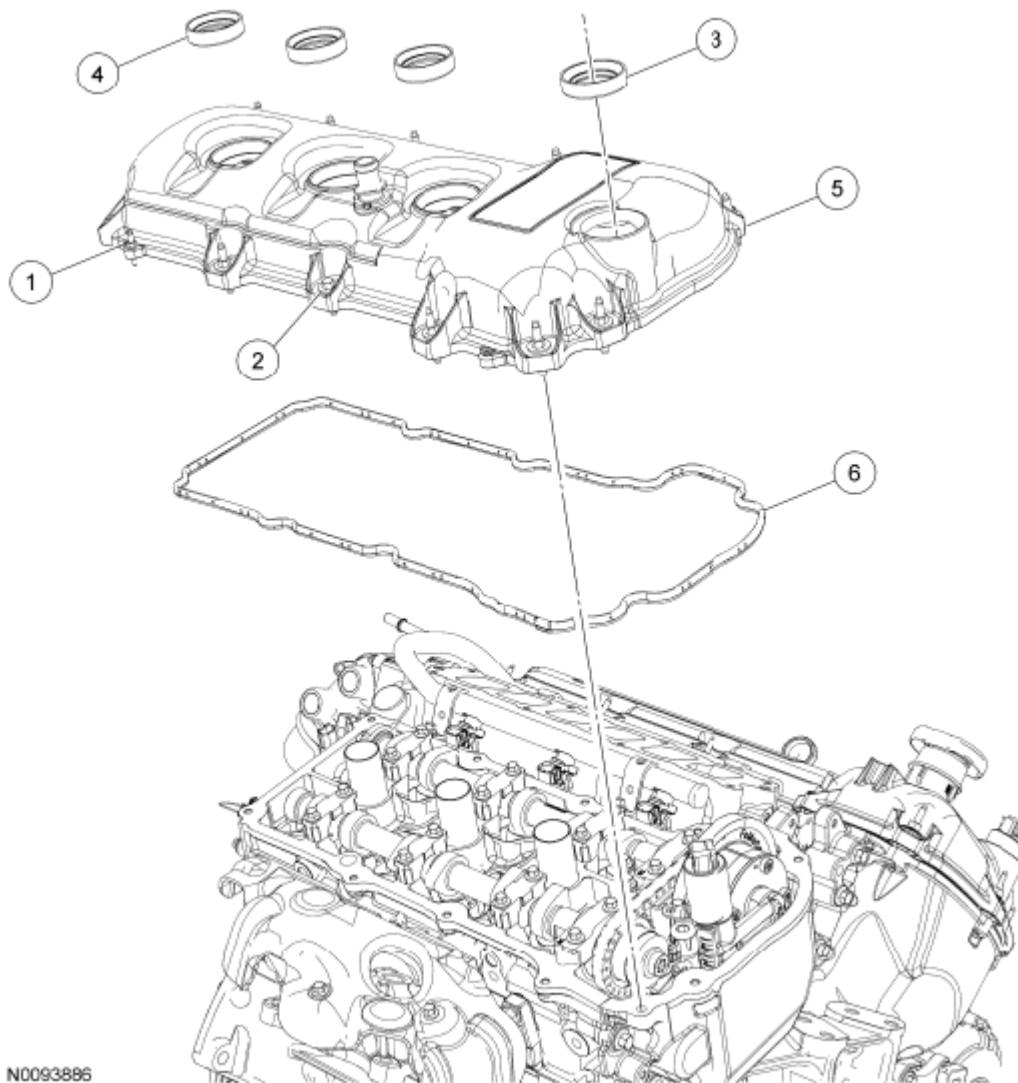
Identifying Valve Cover Components RH (3 Of 3)
